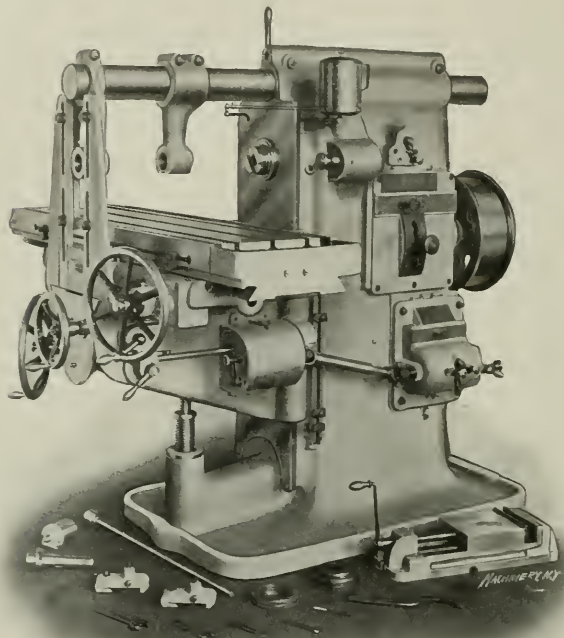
Brown & Sharpe No. 4B Plain Milling Machine.
